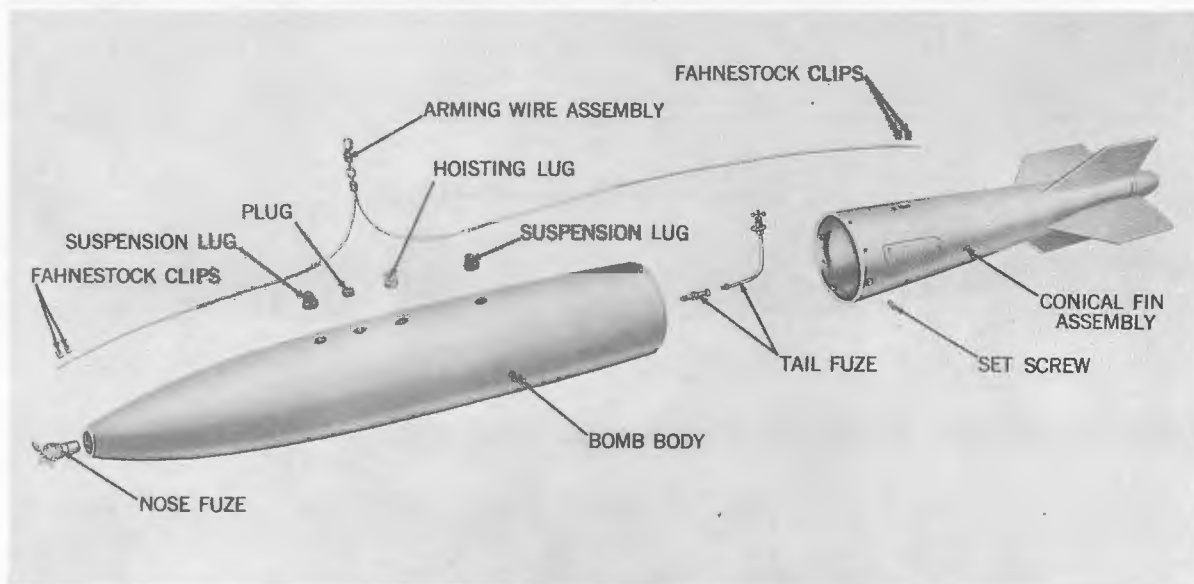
2000-lb Low-Drag Bomb (GP) Mk 84 Mod 1 (Mechanically Fuzed), Exploded View.
